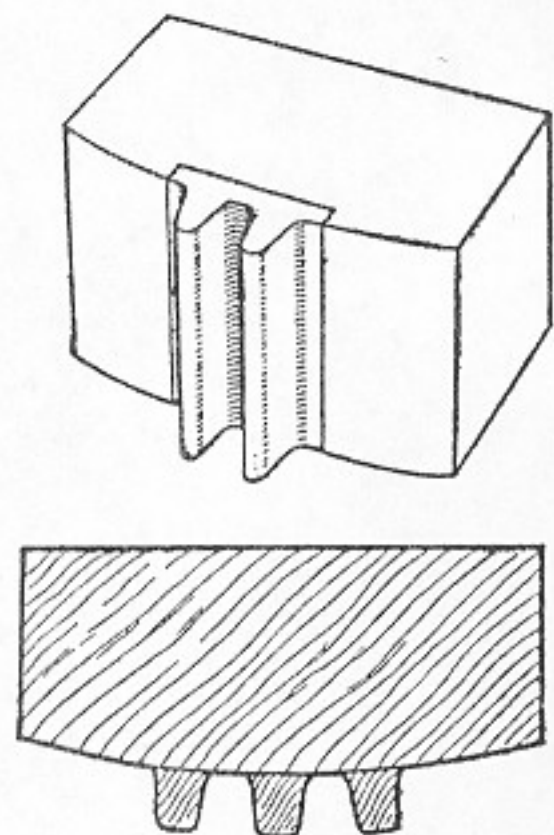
Tooth-blocks used for molding gears. They consist of a short segment of the periphery of the gear to be molded.
